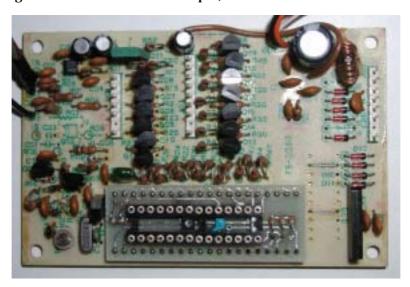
Completed COUNTER DISPLAY UNIT (w/o PIC16F873)
